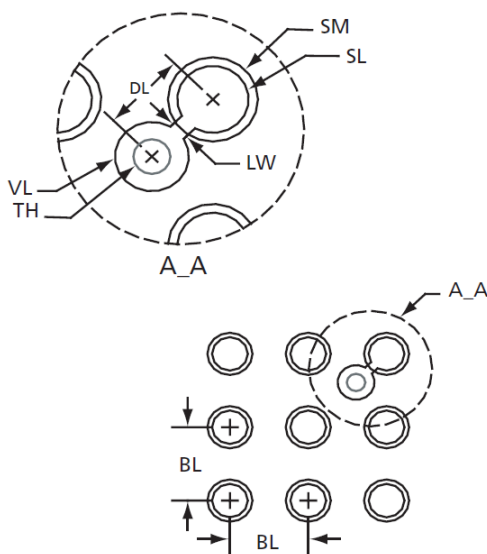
Board Layout of Soldered Pad for QFN Devices according to Intersil TB389
